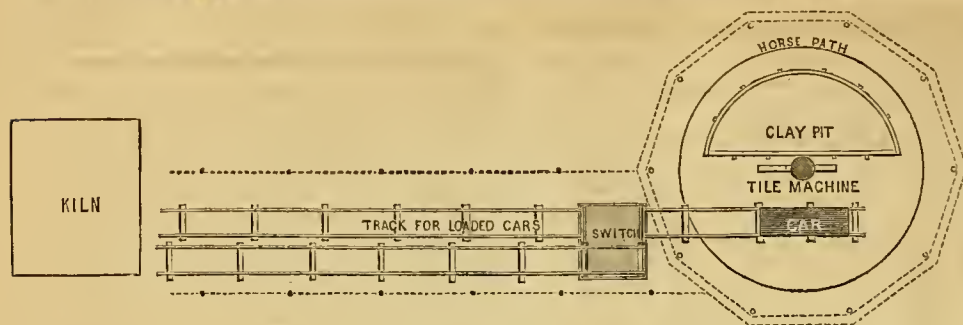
GROUND PLAN OF DRAIN TILE WORKS.
